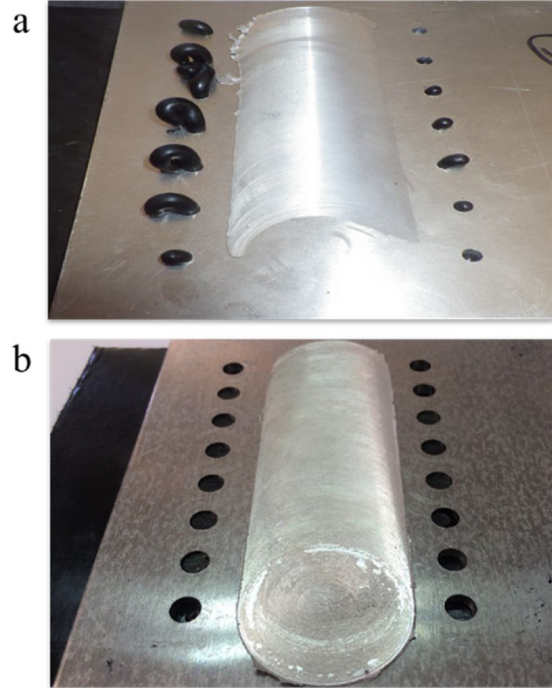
shows the especially dedicated clamping system which was designed and built just for the carried out experimental campaign
